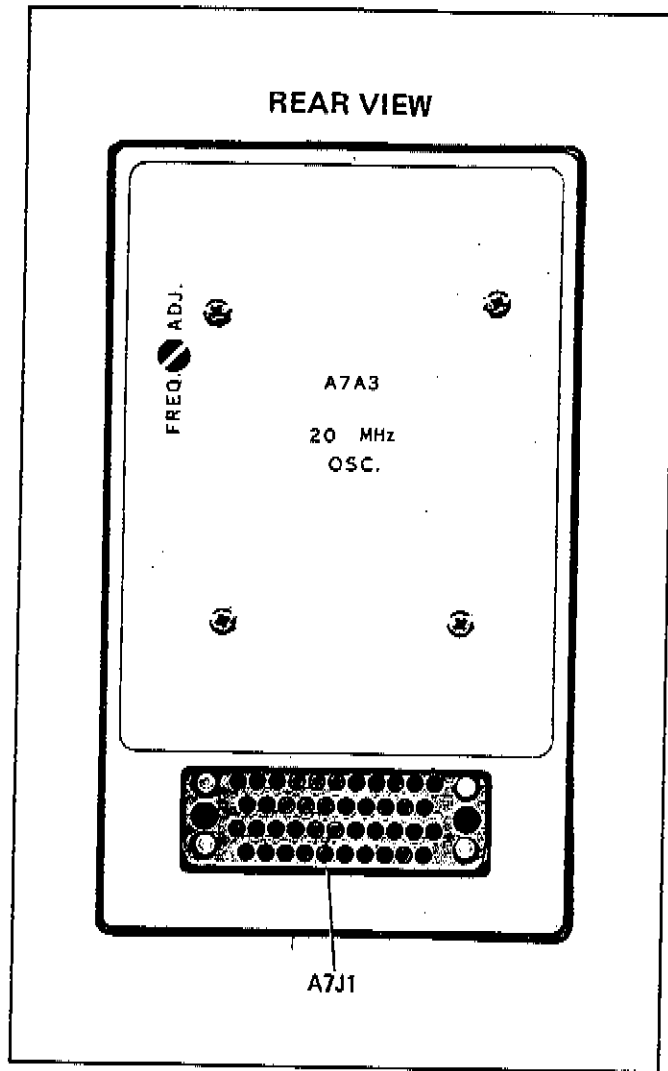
Chassis Mounted Parts, Assembly and Adjustment Locations
